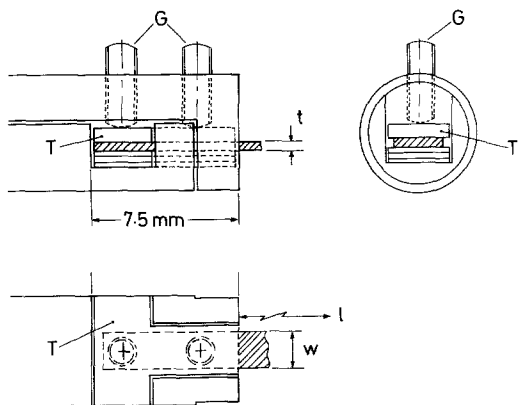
Sections through one of the grips used. The items G are grub screws pressing onto the T-shaped plate T which holds the sample (shaded) in place. The narrower, unmarked strips are spacers of the same shape as T used to ensure that samples of differing thickness are centred along the grip axis.
